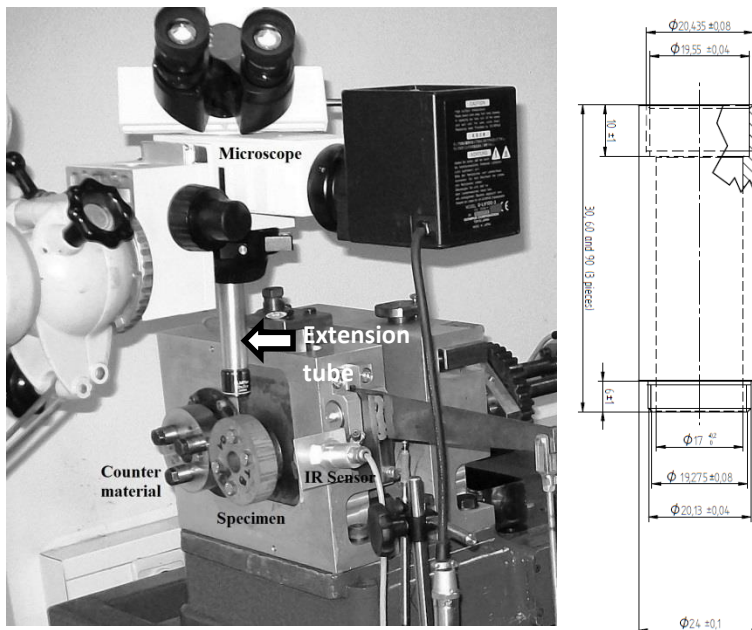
Schematic view of the microscope arrangement with the extension tube and the technical drawing of the extension tube.
